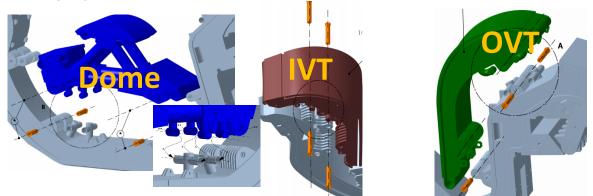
Mounting and Welding Cooling Pipes of Dome, IVT and OVT on CB
